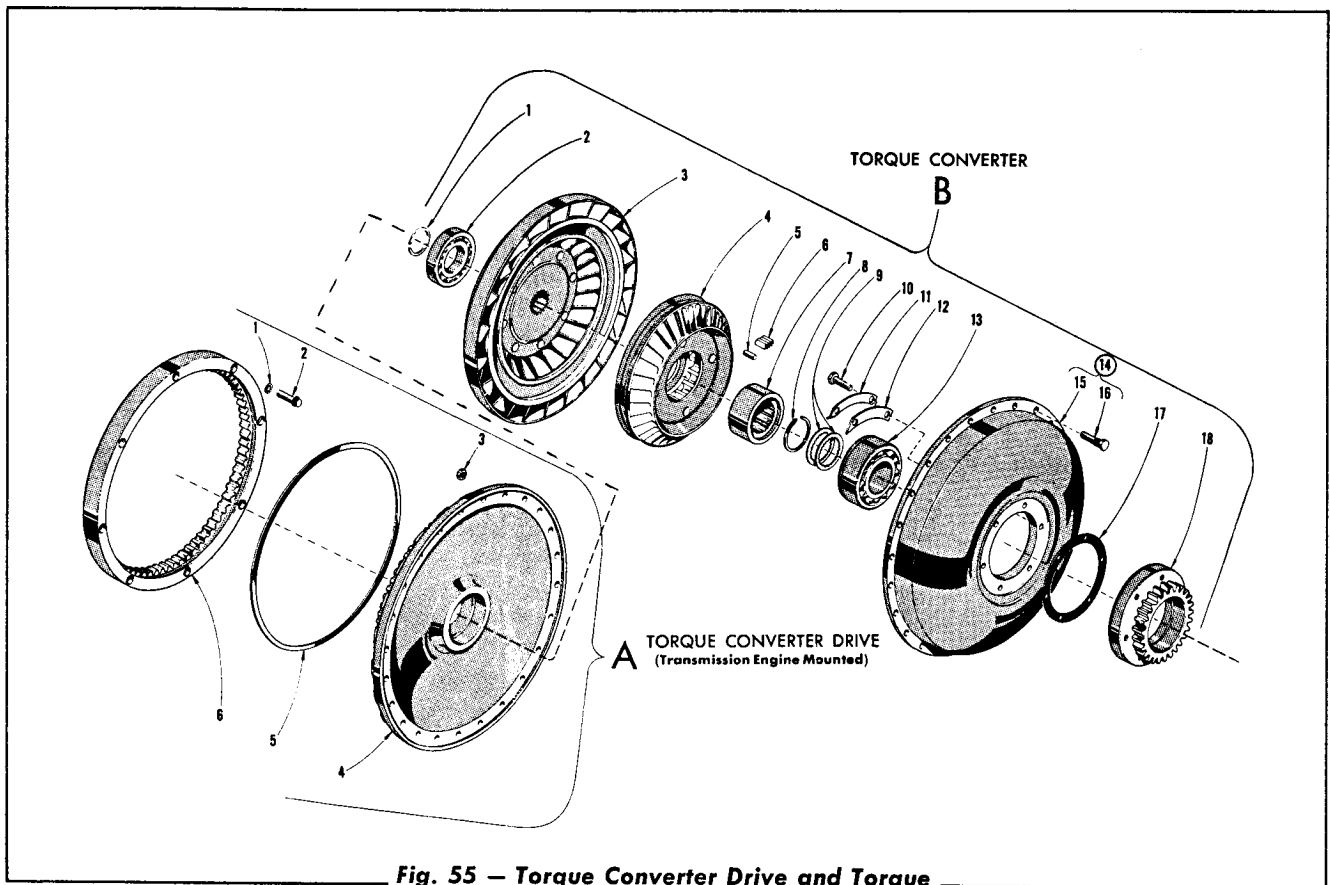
Torque Converter Drive and Torque Converter Assemblies
